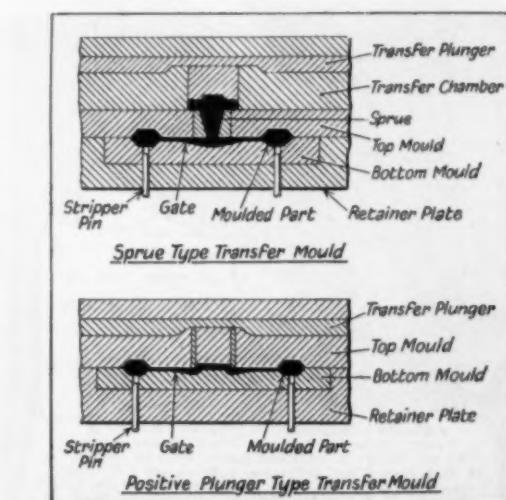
Transfer moulds may be of either the sprue mould type or the plunger type. With the latter, mould costs and part costs are reduced, and the design of the mould is less complicated.
